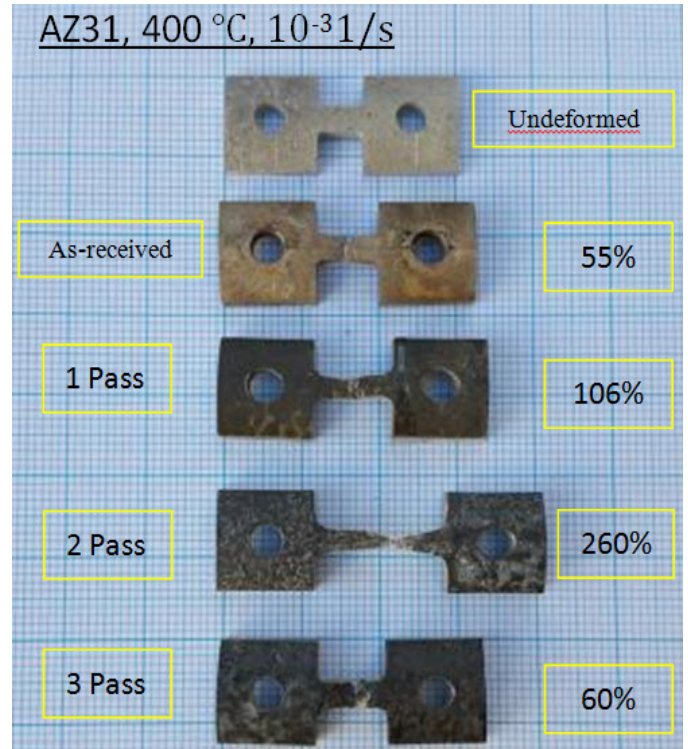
The appearance of fractured specimens after the tensile test at 400°C
